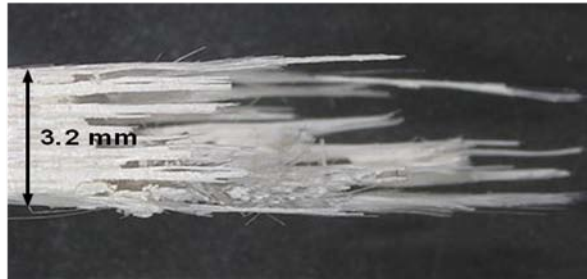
Fracture surface of the N720/AM specimen tested in creep at 131 MPa in steam at 1000°C (side view).
